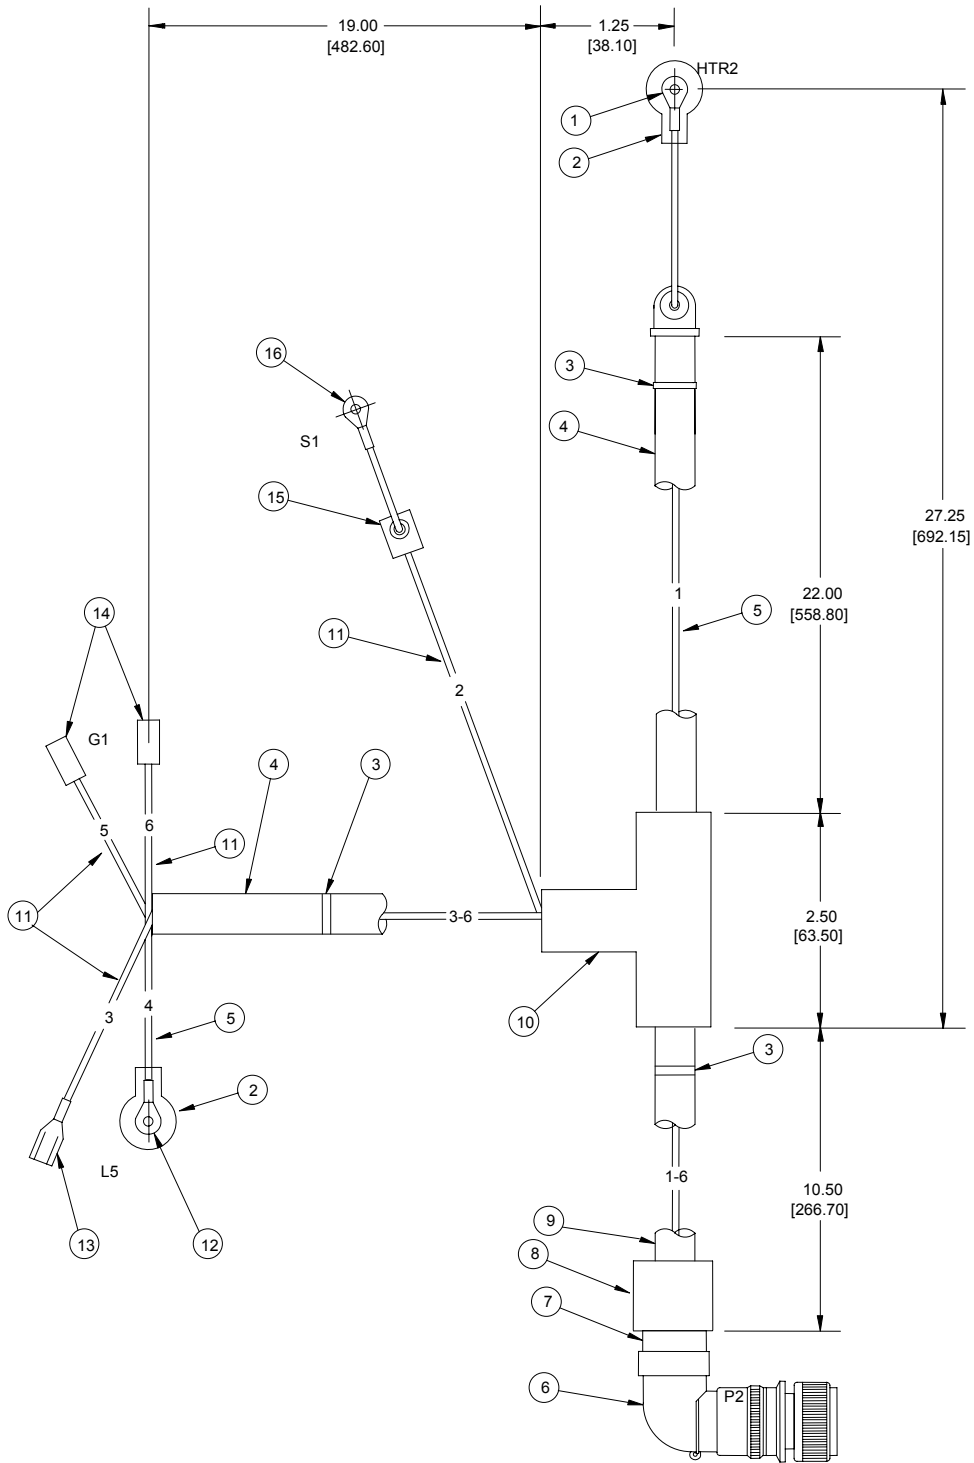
Wiring Harness, Engine (P/N: 95-8029) (Sheet 1 of 3)
